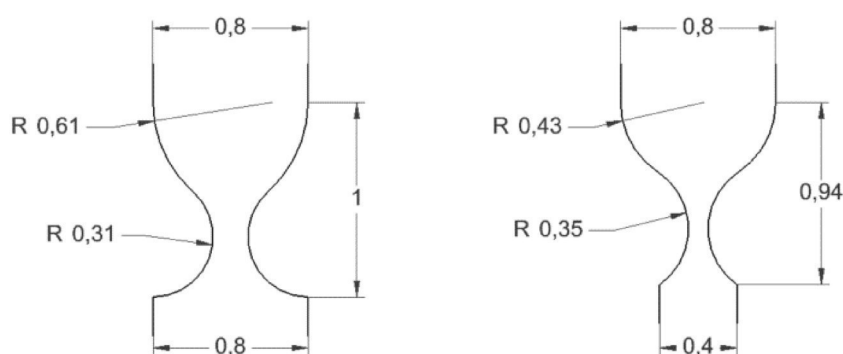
Dimensions of the two blocking valves. Left: Valve at the end of a 0.8 mm-wide channel connecting a channel with the same dimensions. Right: Valve at the end of a 0.8 mm channel connecting a channel with 0.4 mm in width.
